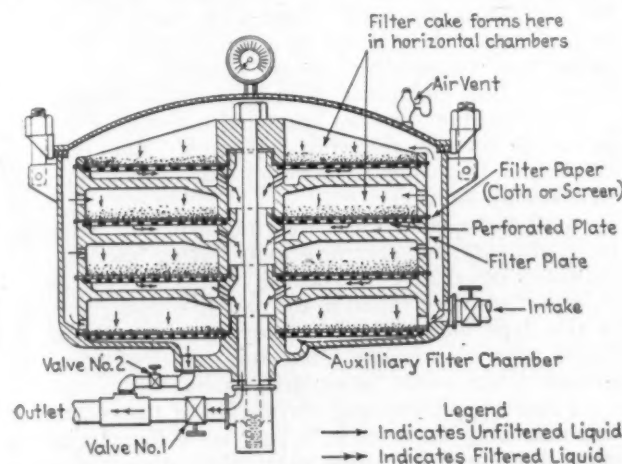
Cross-sectional view of horizontal plate, pressure type filter
